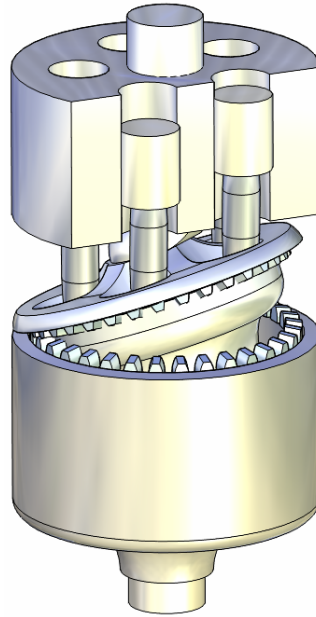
An axial piston type expander. As seen, the pistons (here five) are placed centred around the engine shaft and force the tilted plate (here wobble plate) to move via piston rods. The tilted plate in turn forces the engine shaft to rotate.
